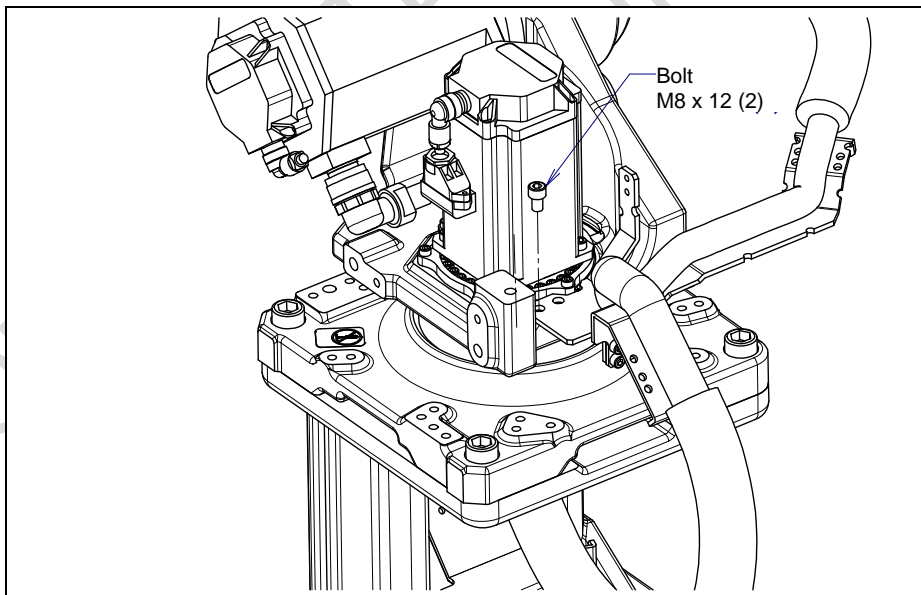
(h) Replacing the cable kit (with pedestal J2 base)
